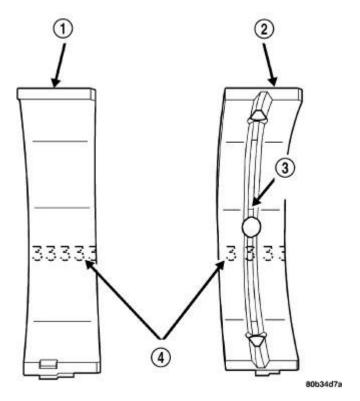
Main Bearing Grade Marks Courtesy of CHRYSLER LLC
